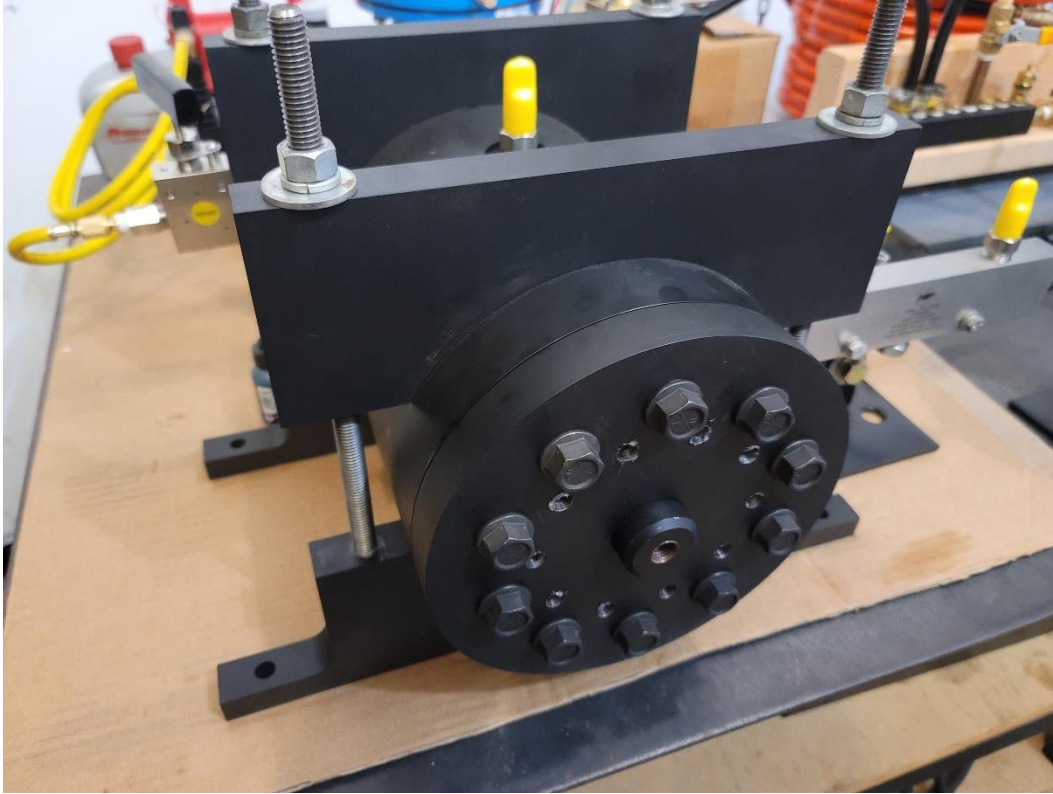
Pressure Chamber Assembly with Cerakote P-109 Coating Applied
